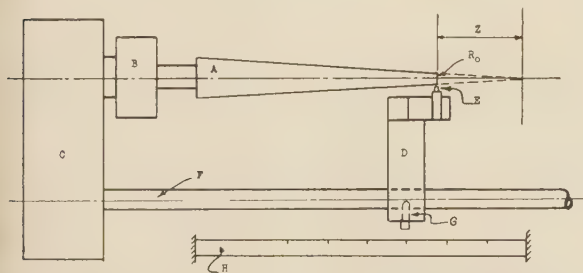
DIAGRAM SHOWING FORMER SUBSTITUTED FOR LEAD SCREW OF LATHE TO MAKE REAMERS OF ANY SIZE, TAPER, OR HELIX ANGLE
